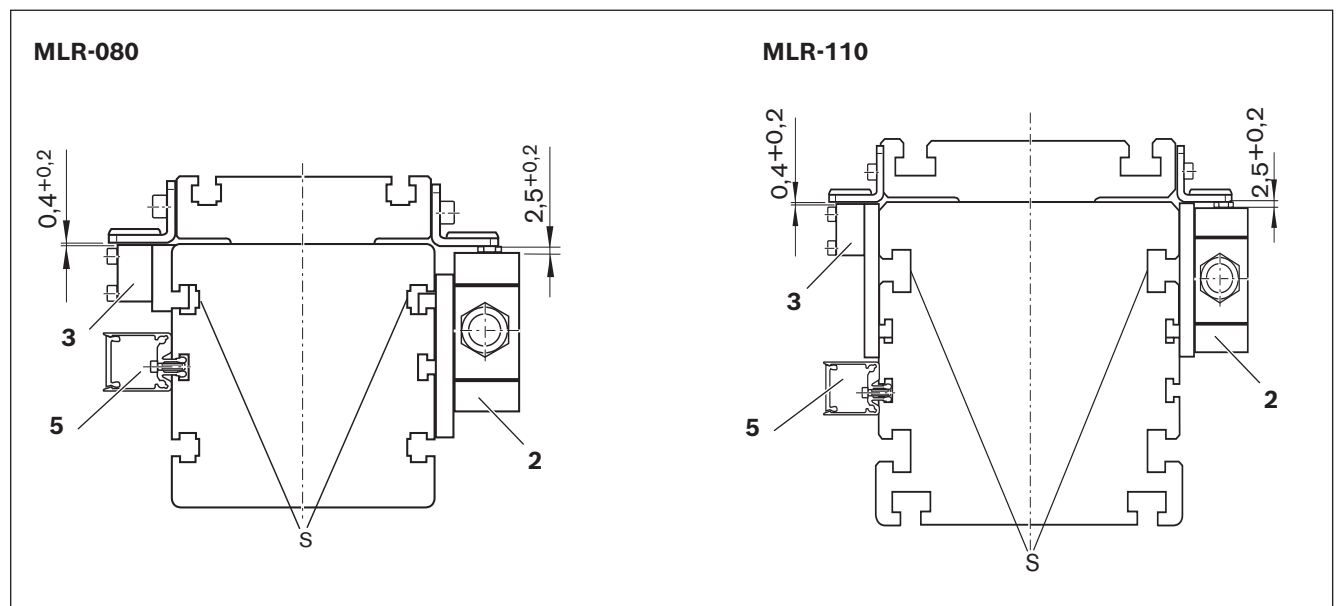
Proximity sensors and mechanical switches MLR-080/-110-NN-3
